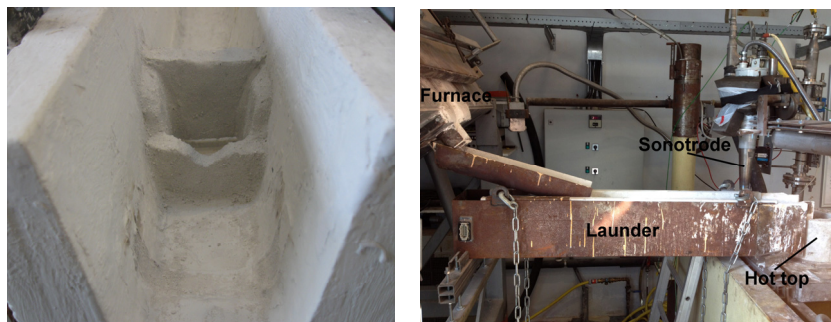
The baffle design in DC casting launder (left). The width of launder is 110 mm. The right picture shows the set up during DC casting with UST.
